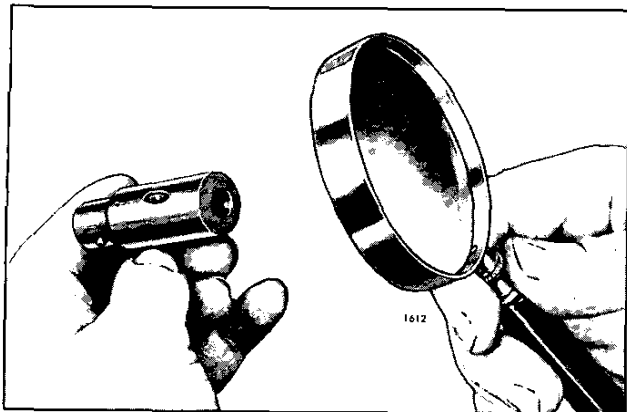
Examining Sealing Surface with a Magnifying Glass
